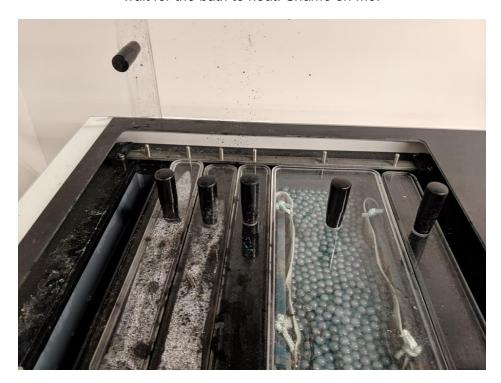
Bath 1 cover removed and placed in slot-holder behind the tool.
